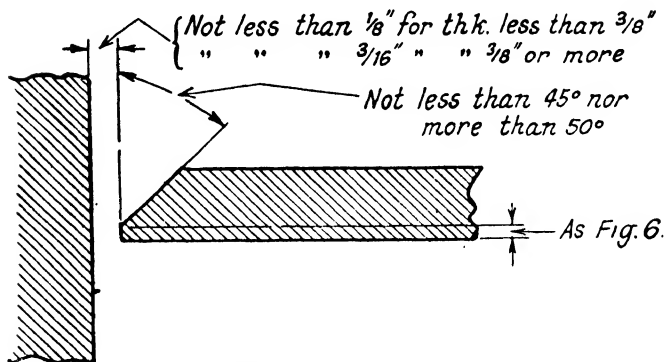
SINGLE BEVEL BUTT WELD
